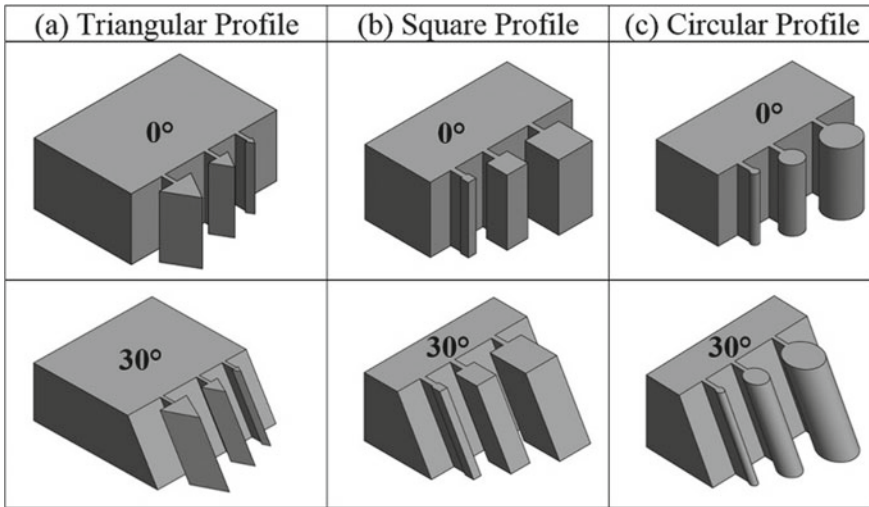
Machined a triangular, b square, and c circular taper profiles
